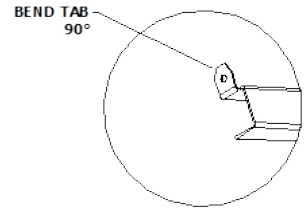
Install Aluminum Filter Bottom, if Applicable (Step 3).
